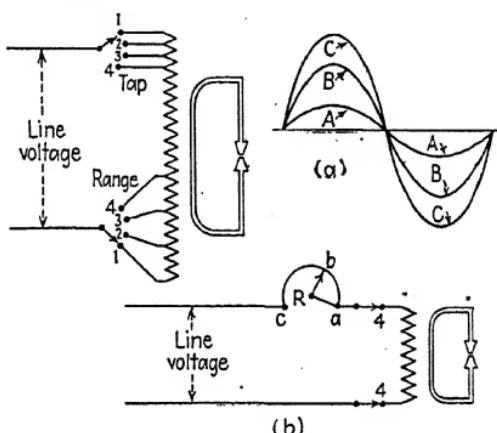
A.—Weld heat changed by transformer taps.
